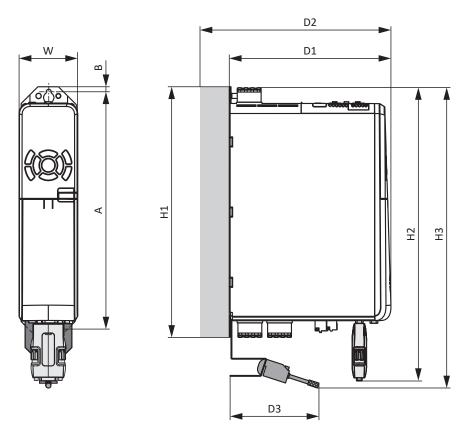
SD6 dimensional drawing, sizes 0 to 2
